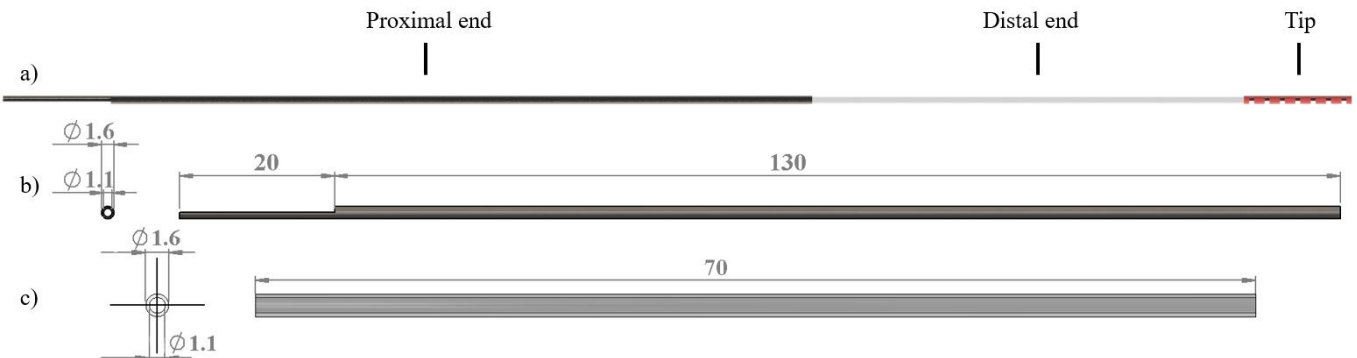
The shaft assembly (a). The proximal end with dimensions in mm. The left side has half of the circumference cut out (b). The distal end with dimensions in mm (c).
